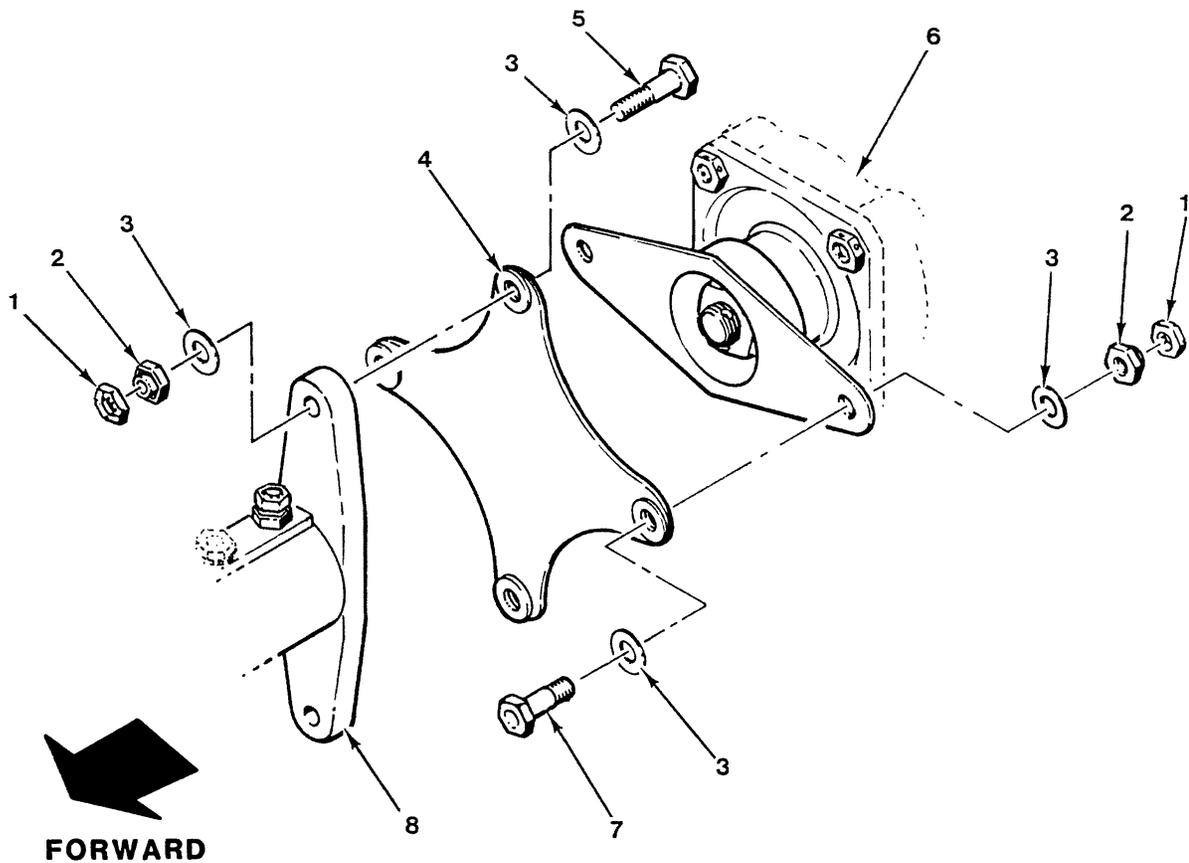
AFT FLEX PLATE INSTALLATION
